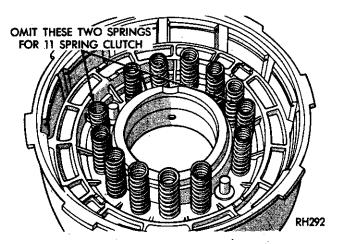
Front Clutch Spring Location—11 or 13 Spring
